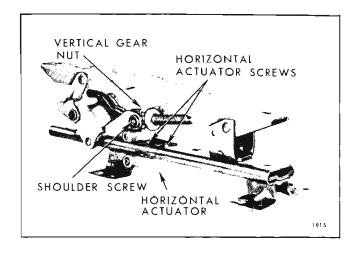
H7-Front Seat Adjuster Four-Way Tilt
